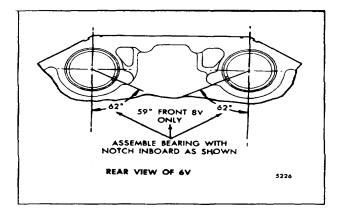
Location of Notch in Relation to Shaft Bore Centerline
